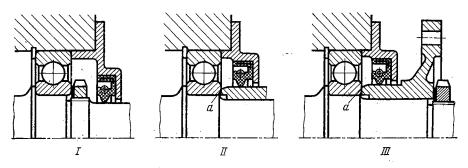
Instances of seal-unit installation I—on shaft; II—on intermediate sleeve; III—on hub of a part carried by shaft
